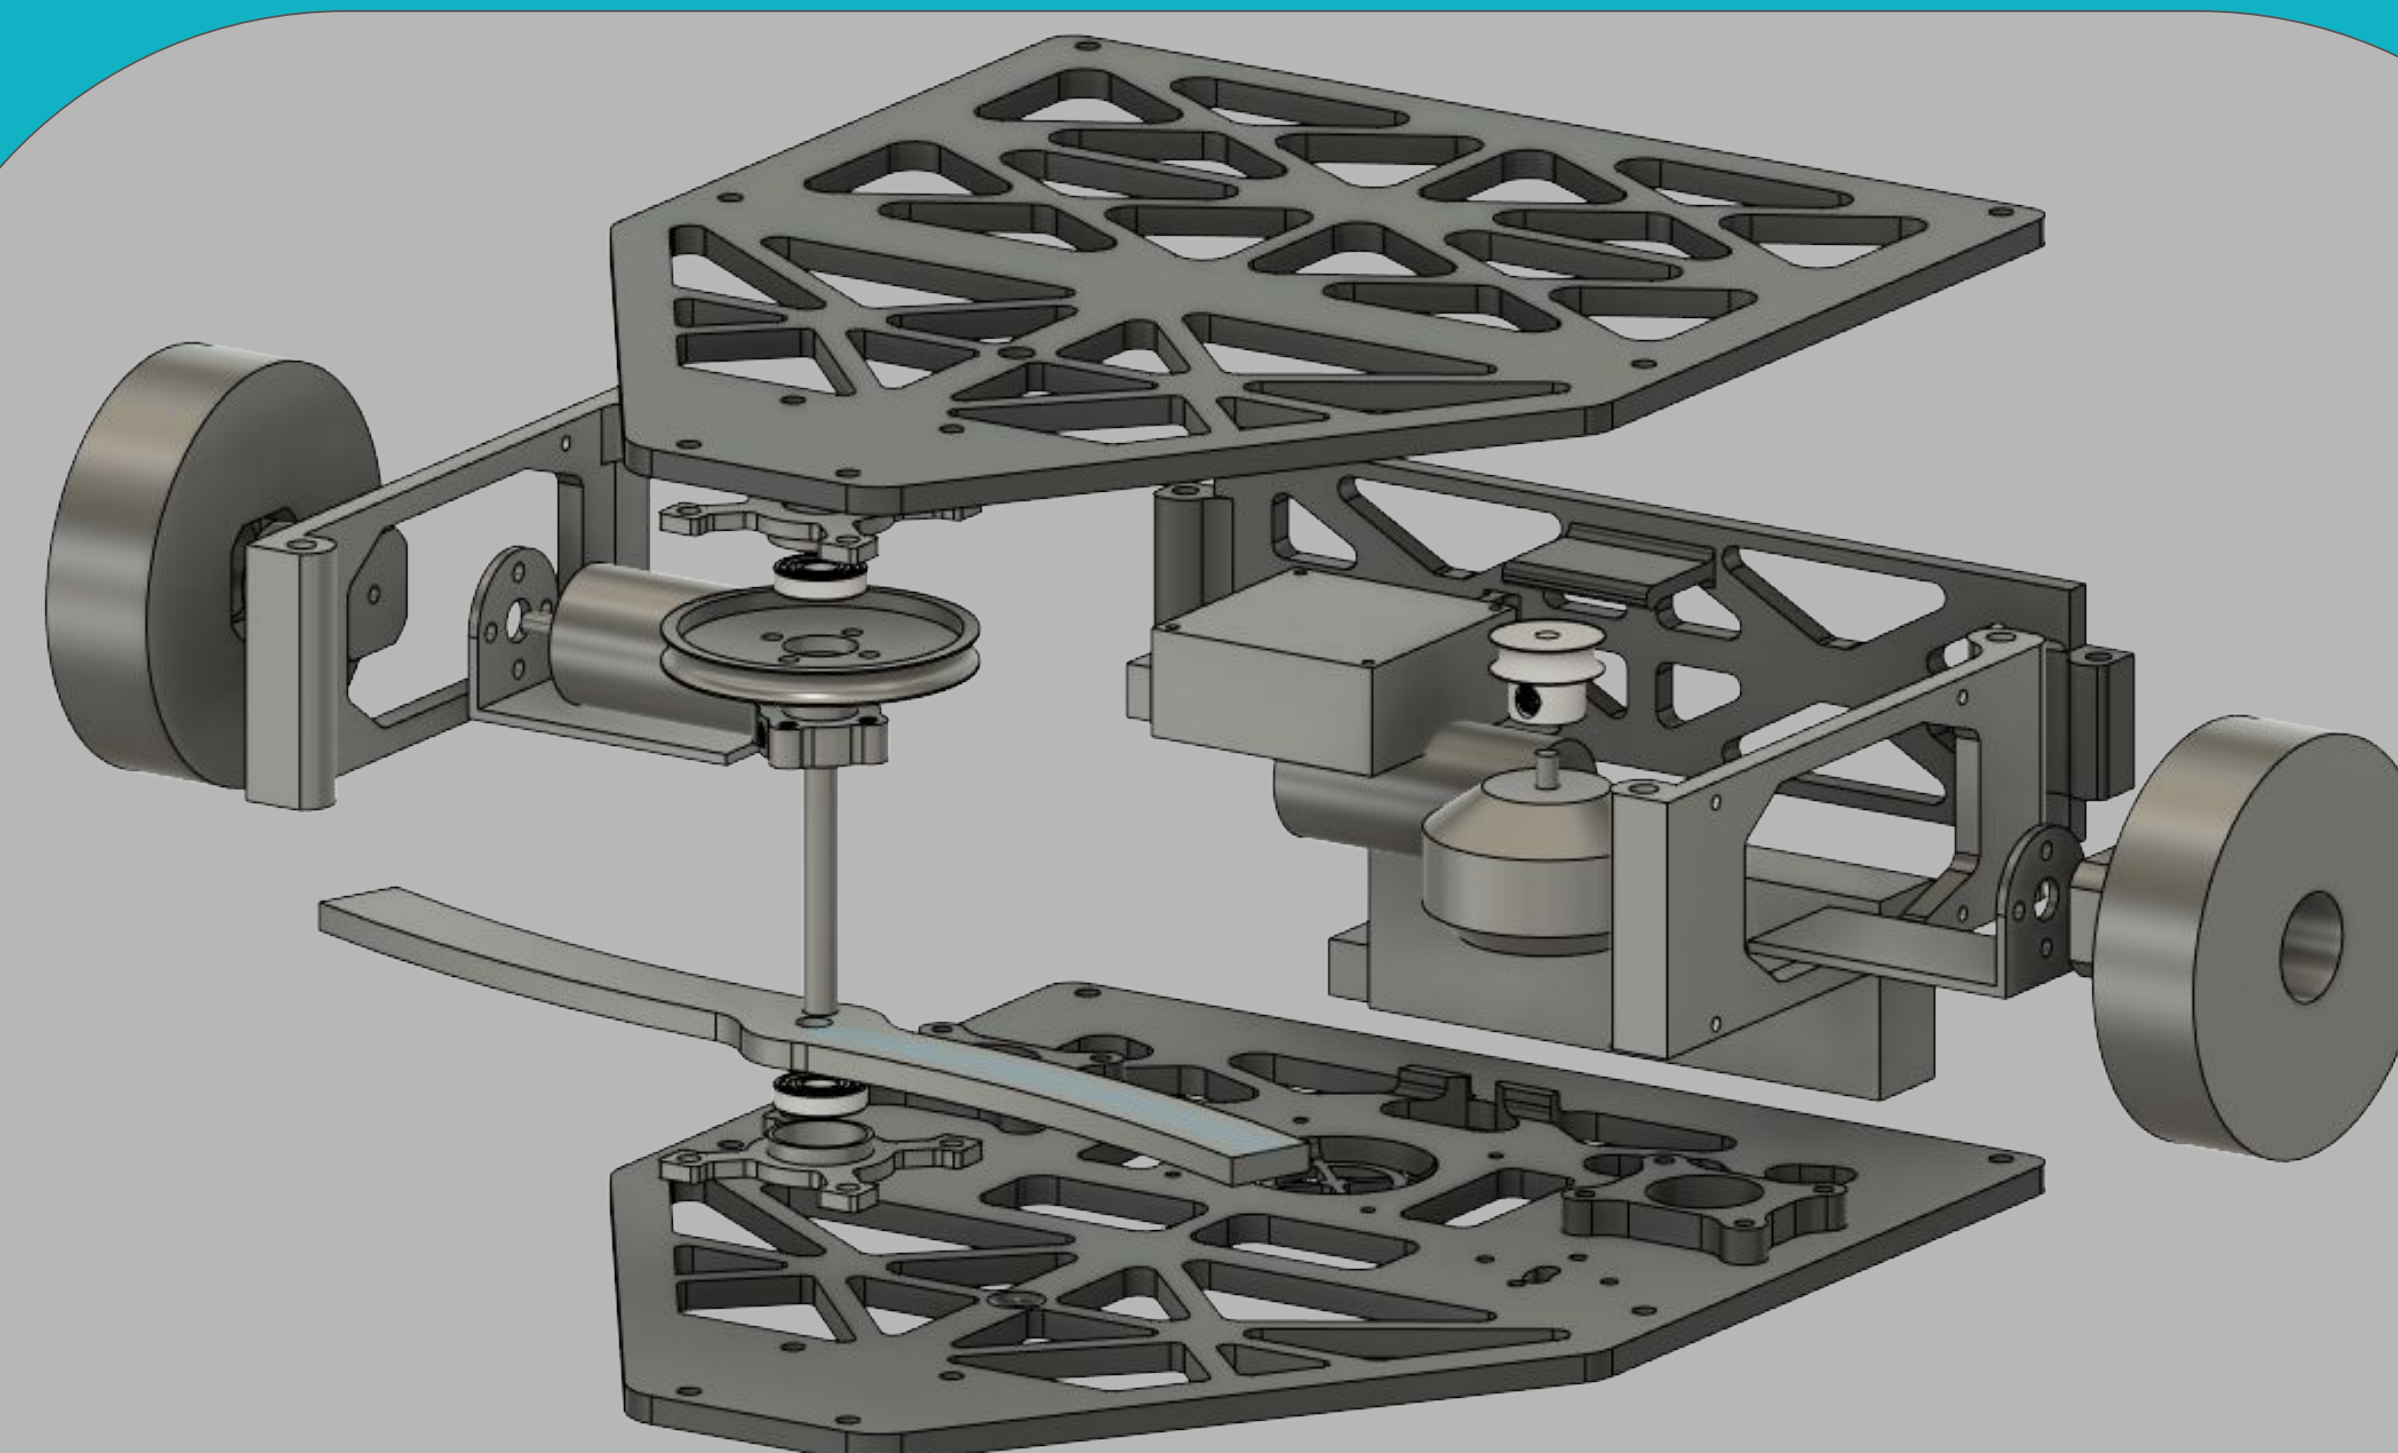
(Above) An exploded view of the current CAD assembly. With a large rotating blade to attack, reinforced armour to protect exposed wheels, and a light, nimble frame to move quickly around the arena.
